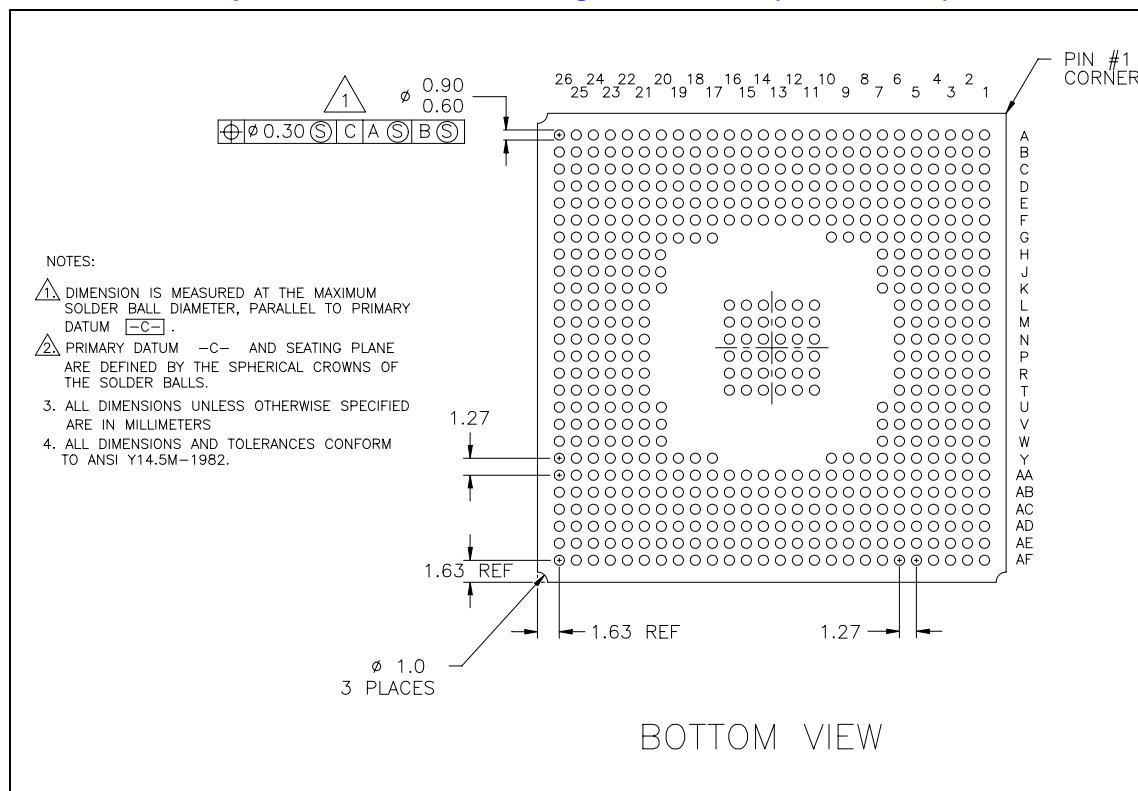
Intel® 815EM Chipset GMCH2-M BGA Package Dimensions (Bottom View)
